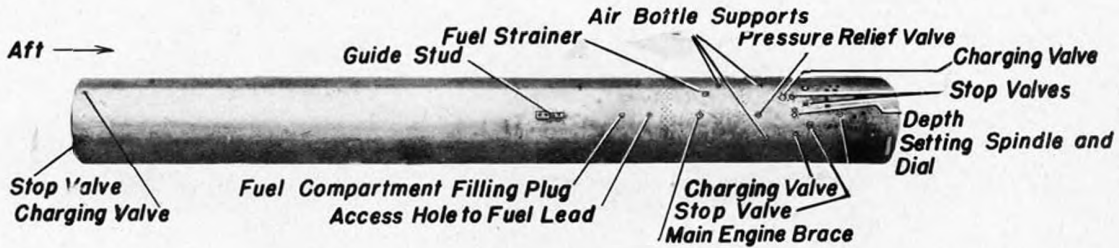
Torpedo Type 92-1, Tail Section, Starboard View
